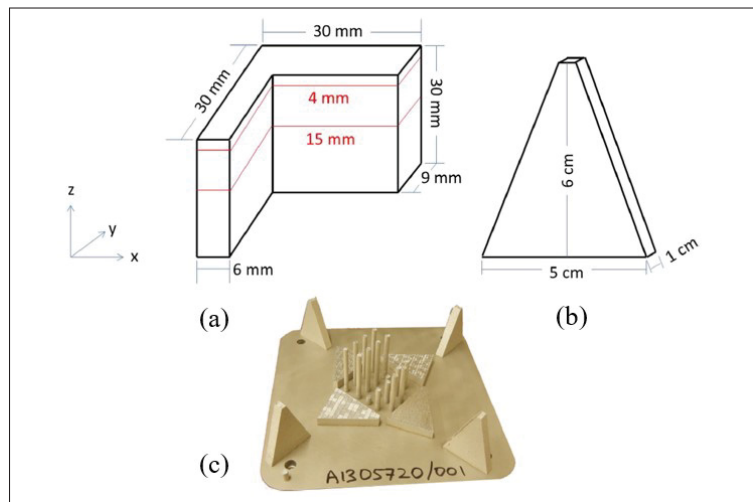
(a) L cross section sample dimensions, (b) Prism sample dimensions, and (c) Built plate containing vertical and horizontal prisms taken from Wu *et al.* (2014, p. 6262)
